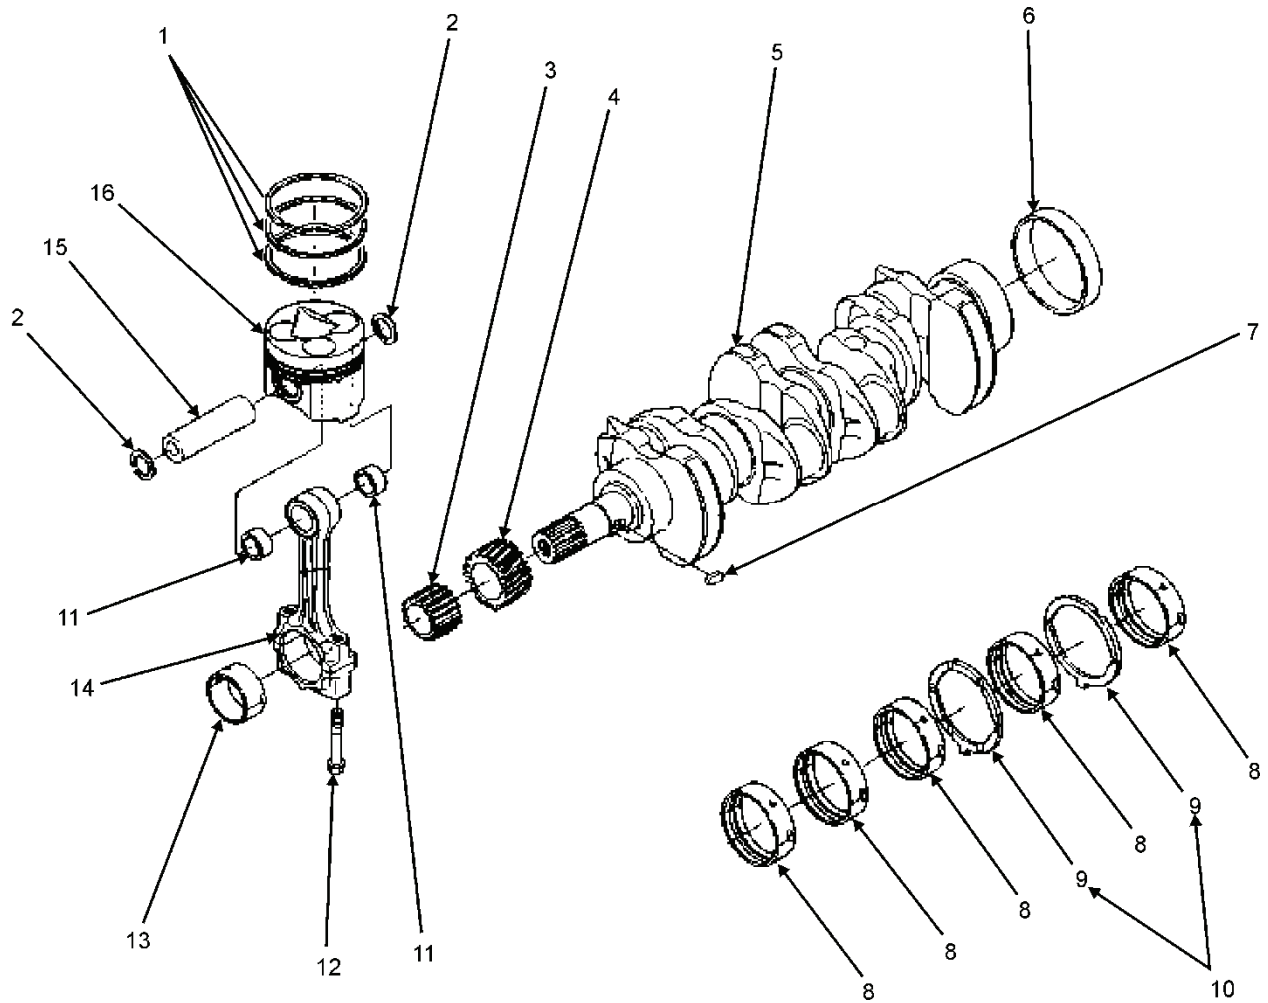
ENGINE PISTON AND CRANKSHAFT
